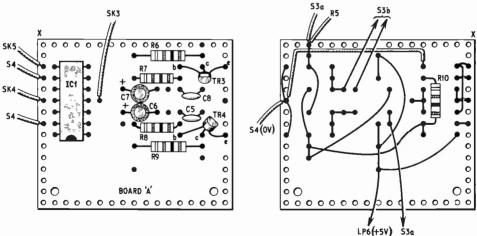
Assembly-and wiring details of pulse generator (Board 'A'). Veropins should be used where connecting flying leads
